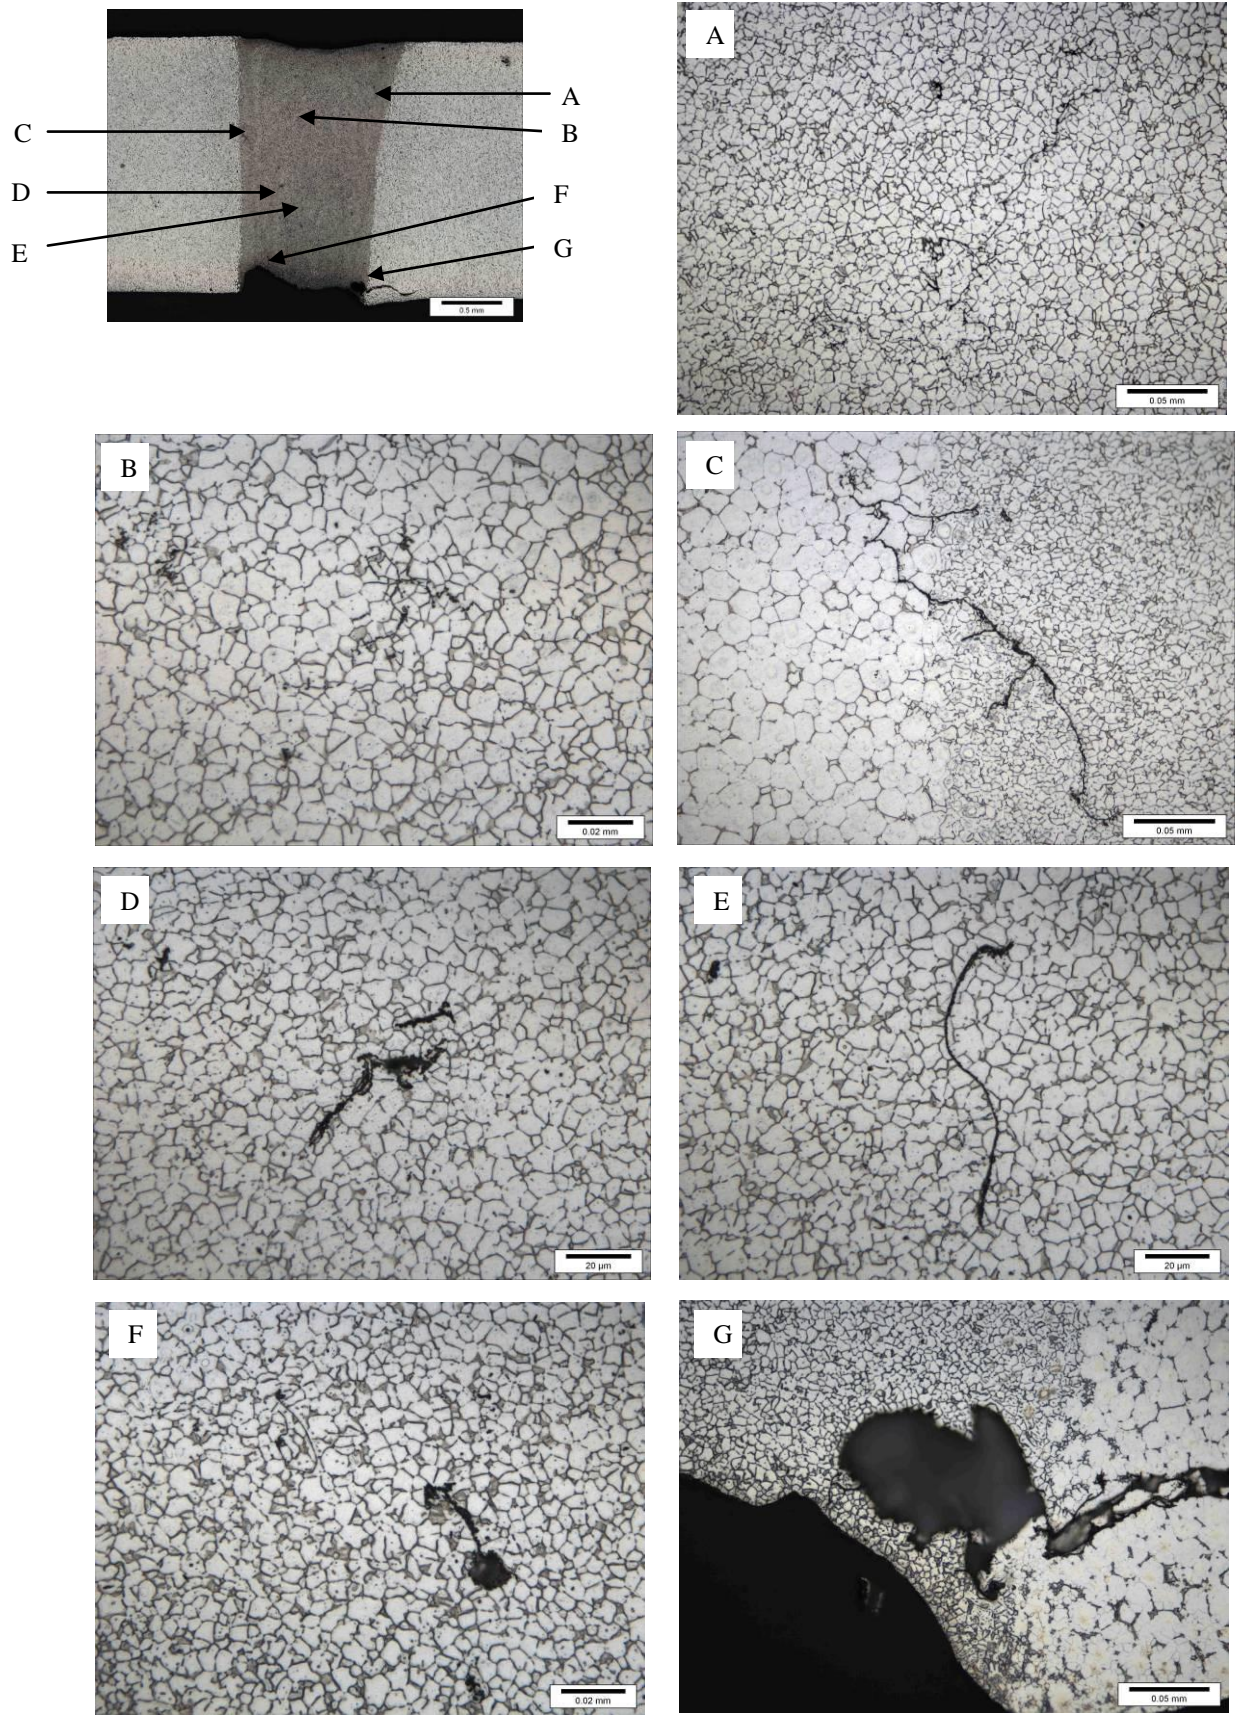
Solidification Cracks in the Sample Welded at 3.5 kW – Start Section
